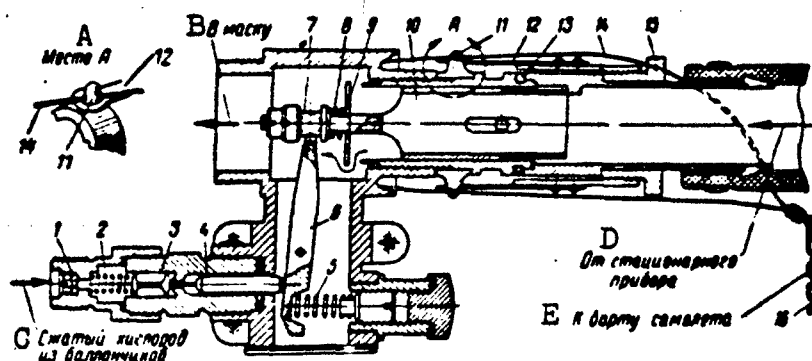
KP-23 equipment switch. 1) Filter; 2, 5, 8) springs; 3) stop-cock; 4) plunger; 6) lever; 7) dog; 9) return-flow valve; 10) rod; 11) insert with conic projection; 12) spring; 13) rubber pad; 14) release pin; 15) screw-sleeve; 16) release chain (halyard). A) Position A; B) to mask; C) compressed oxygen from bottles; D) from stationary equipment; E) to aircraft.
